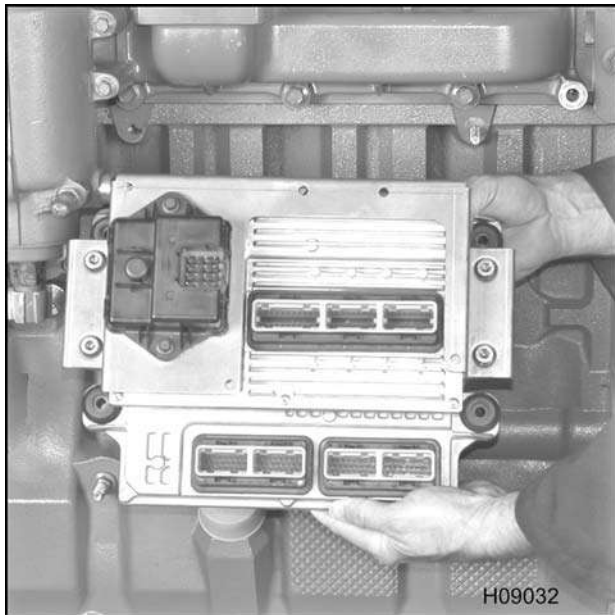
Installing the ECM, IDM, and EGR drive module assembly to crankcase
